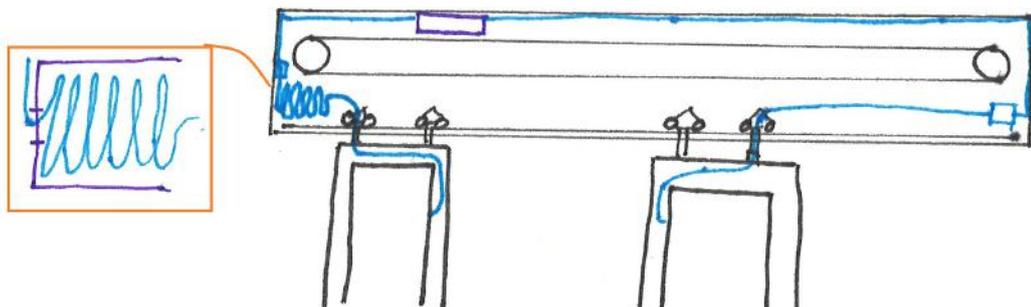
Concept 8 - Cable and bucket. A coiled or flat folded cable is connected to each door leaf. When the doors open the excess cable is folded or coiled into a "bucket" of some sort that is located in the ends of the header profile.
